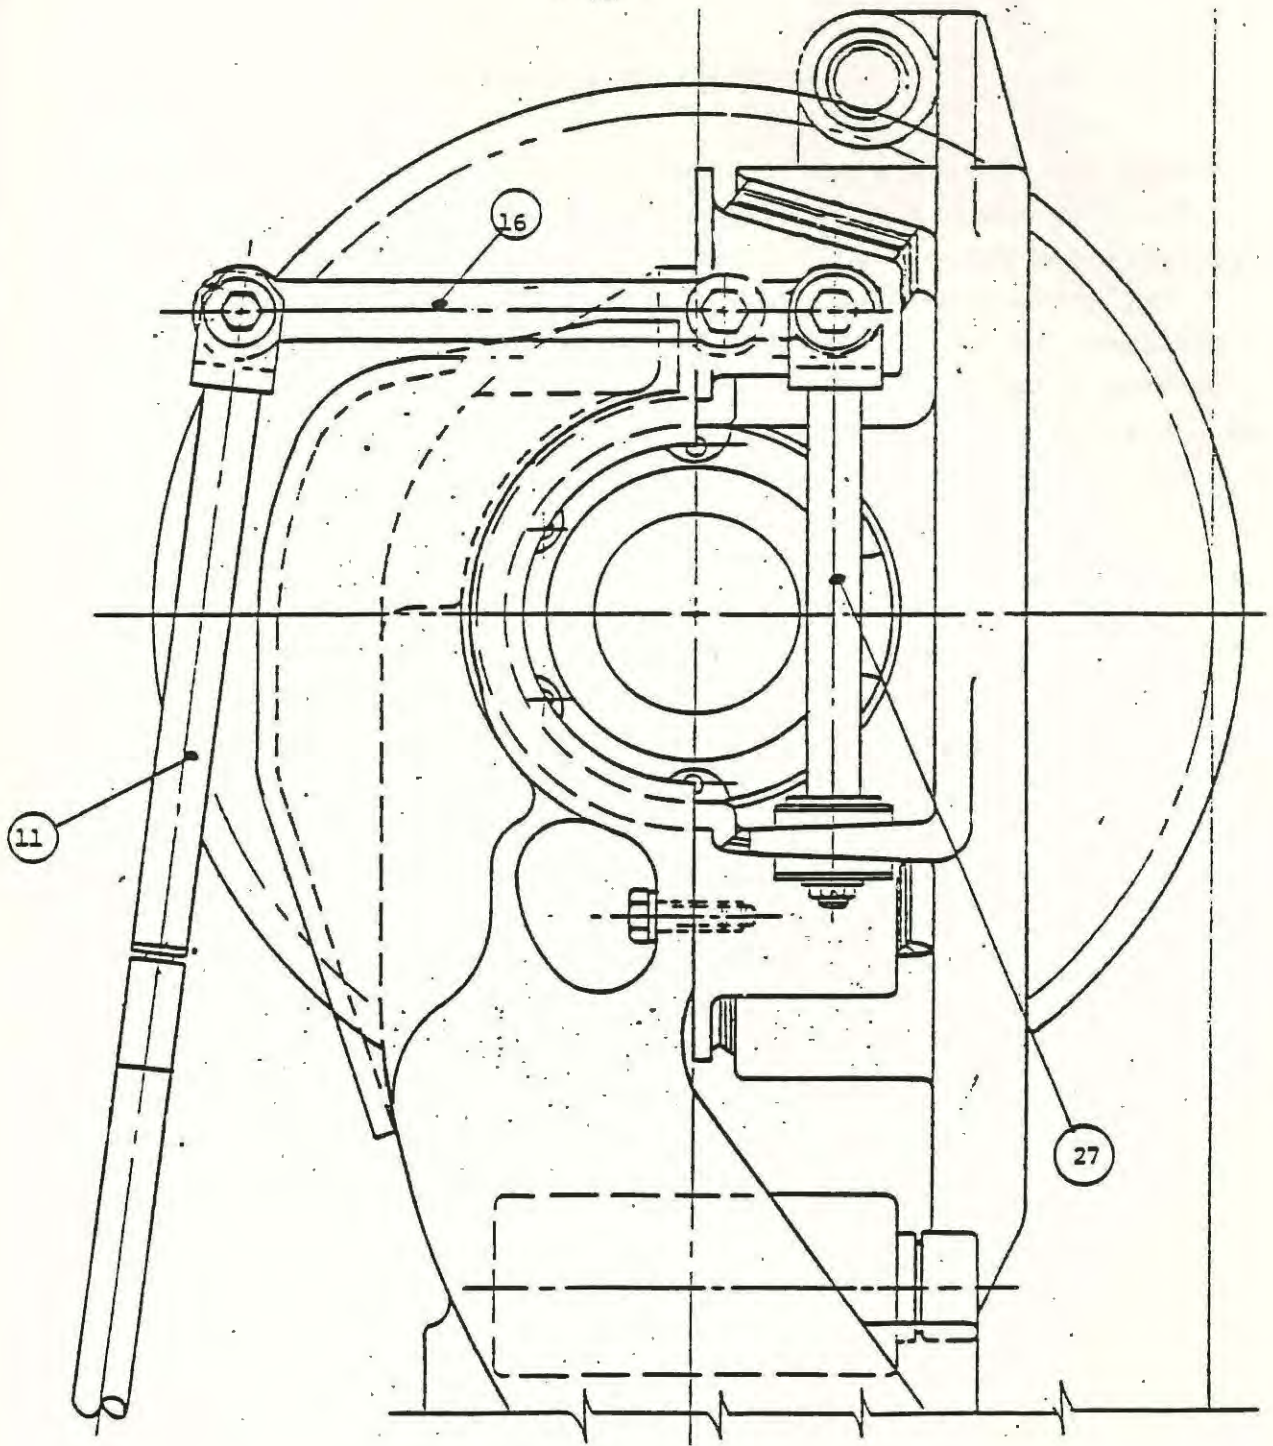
STEERING - FRONT TRUCK OUTBOARD
